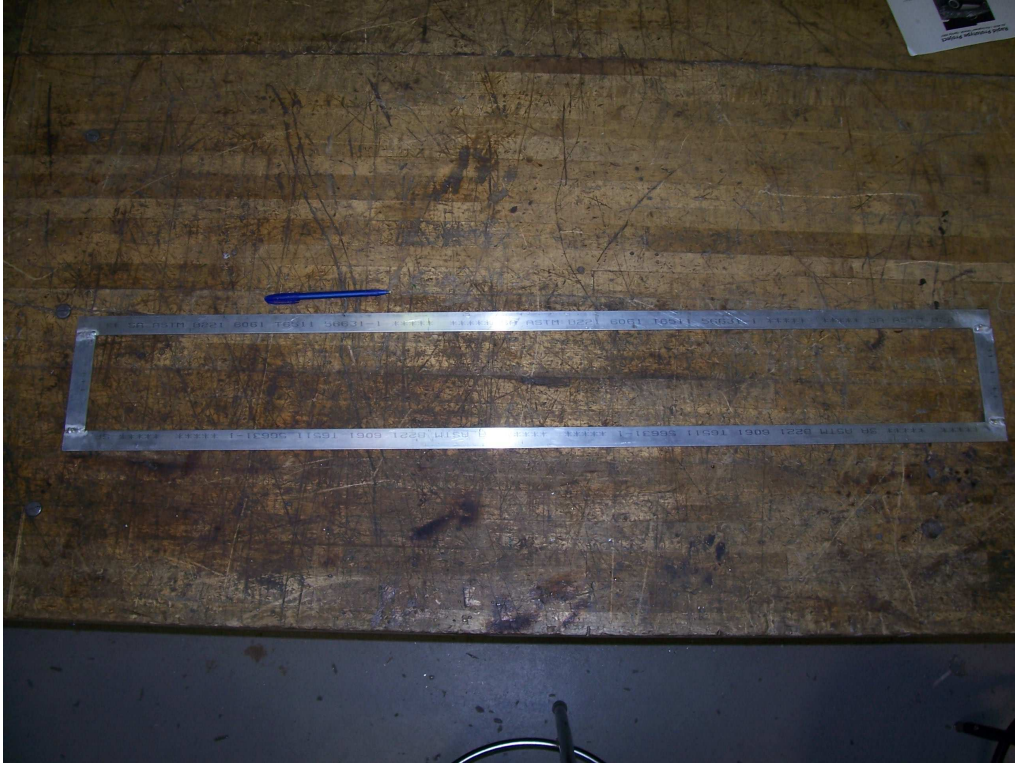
Shown above is the welded outside of the chassis, the pen is placed there for a reference of scale.
